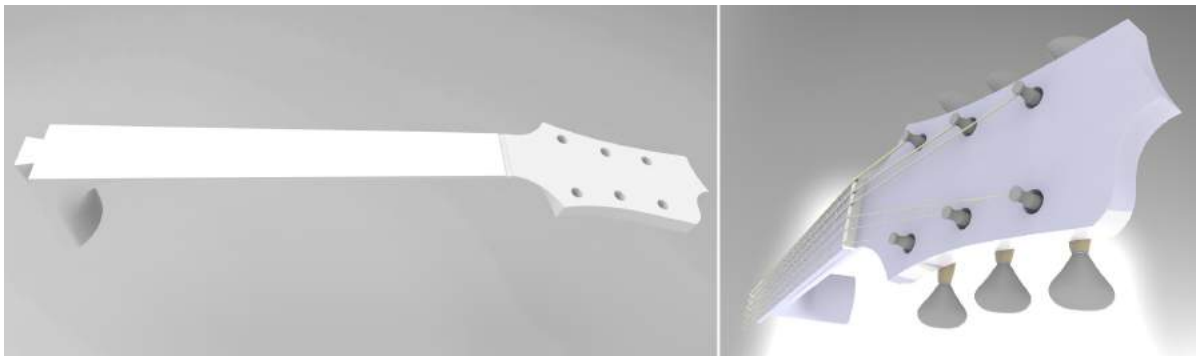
Left: rendering of the neck design featuring a unique headstock design, straight heel and dovetail connection. Right: rendering of the neck, fretboard, tuning mechanisms and strings assembled.
